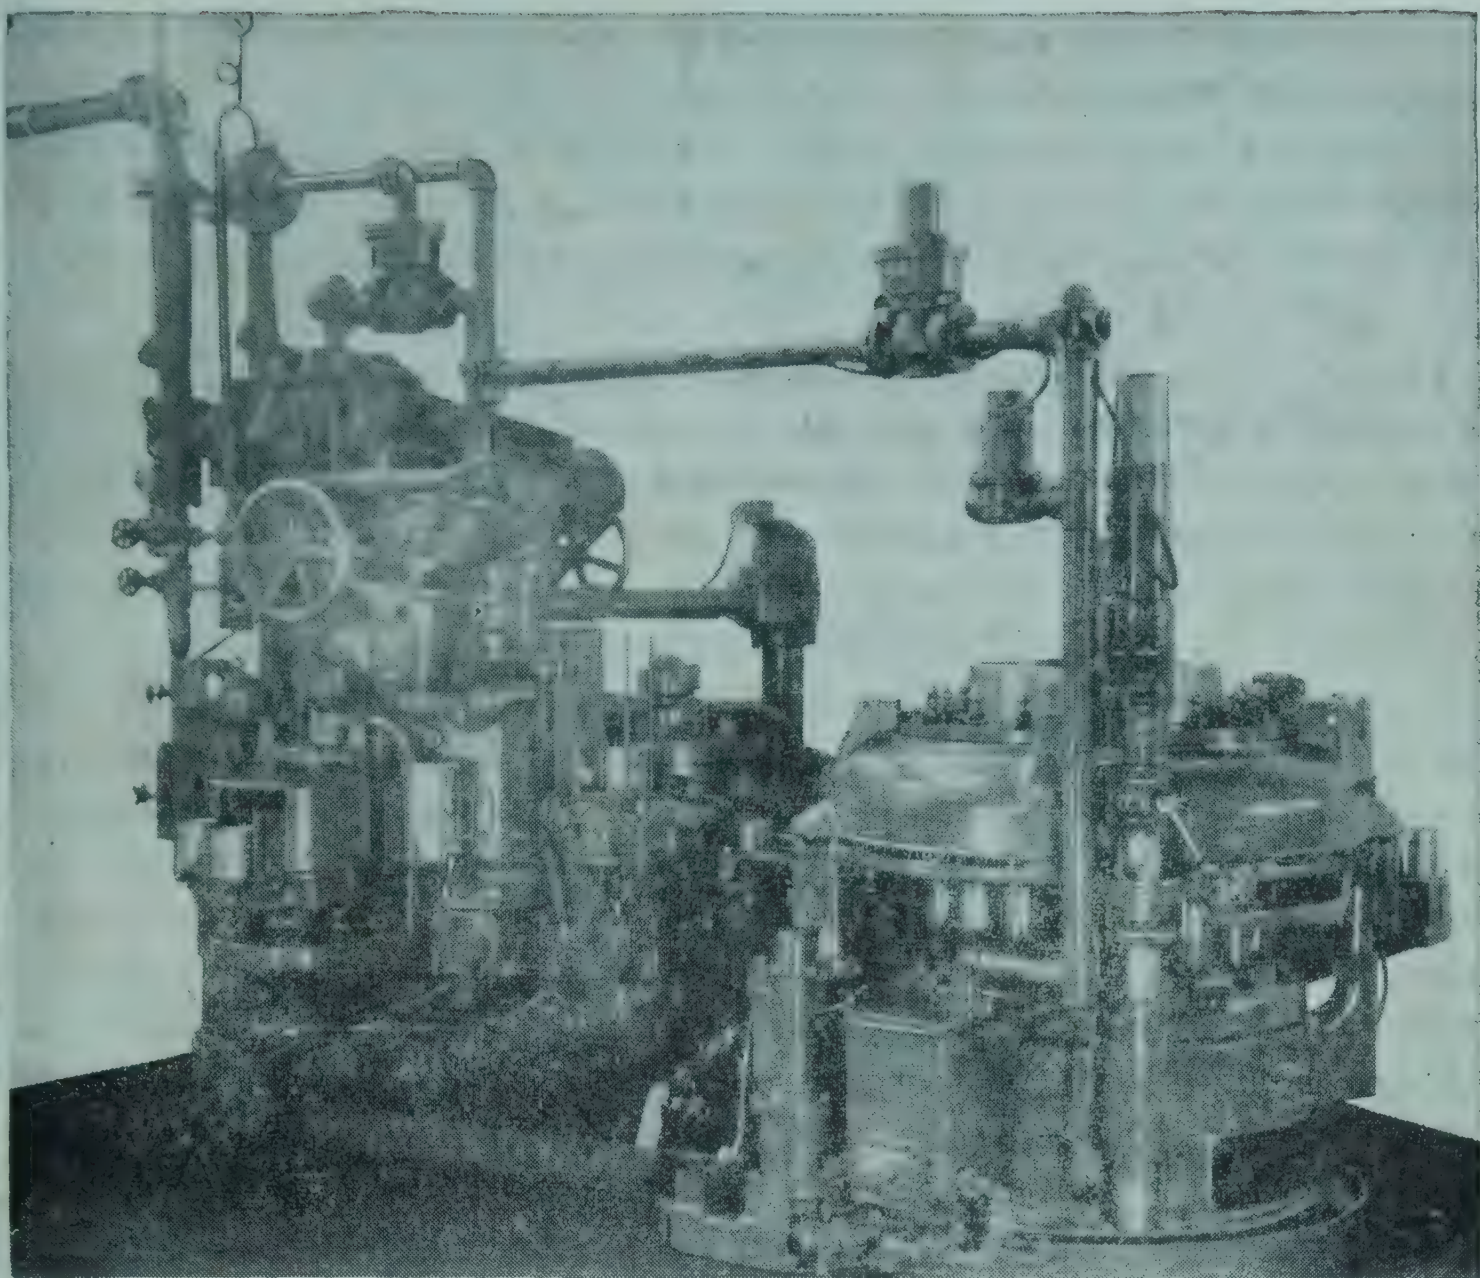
Vacuumizing unit and vacuum-sealing machine. (*American Can Co.*)
